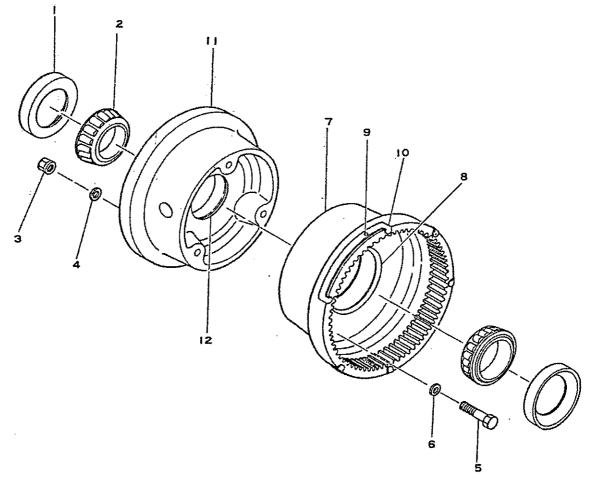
WHEEL ASSEMBLY, MAIN LADING GEAR (USE WITH TUBE TYPE TIRE)
